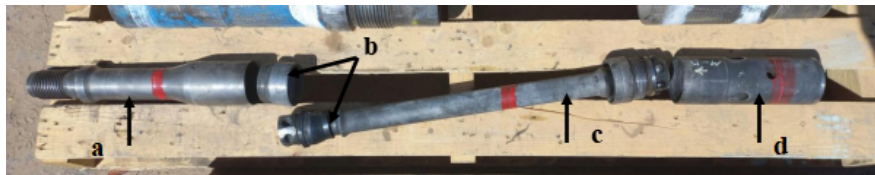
Transmission section parts representing a) Rotor coupling b) seals c) Transmission shaft d) Shaft coupling.
